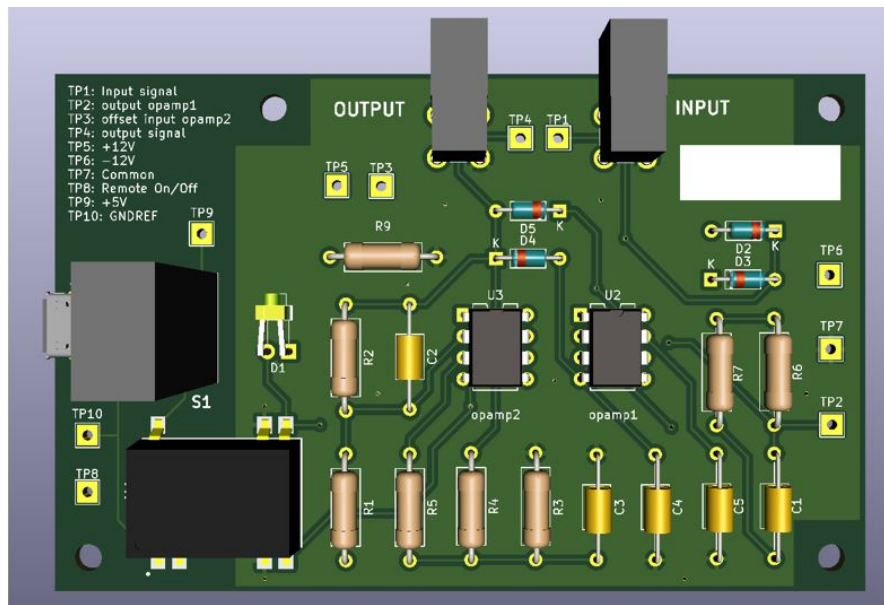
Designing PCB: Opamp circuit PCB in 3D Viewer
